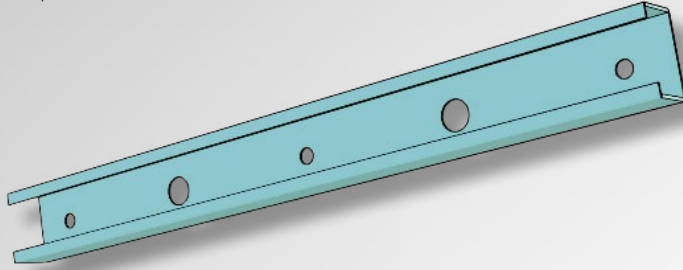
Isometric view of typical 25/14 wall-tie retention channel
